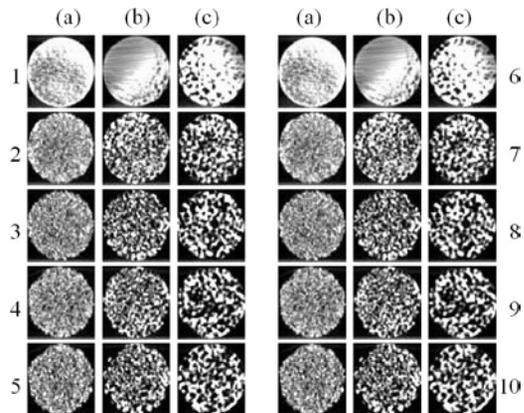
Tomography images of cellular A2011 produced by thixoforming at 640°C , into a layer of space holder particles with dimensions: (a) fine; (b) medium; (c) coarse
